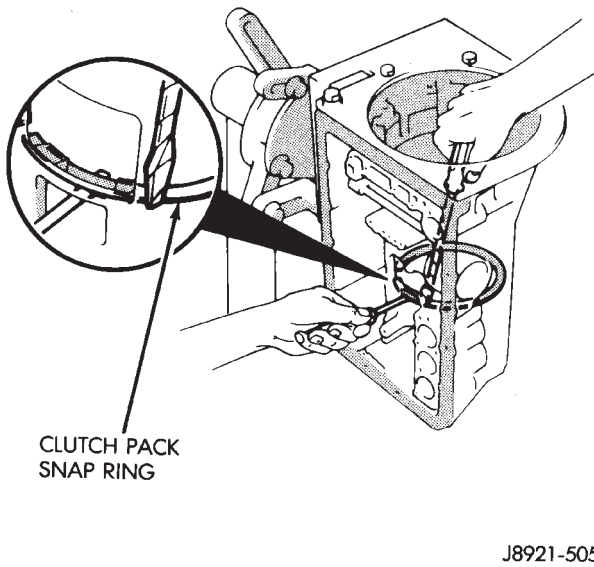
Removing Second Brake Clutch Pack Snap Ring
